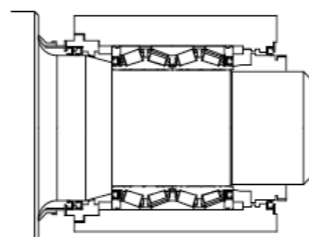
Cross-sectional View of a Roll-neck Bearing on a Rolling Mill
